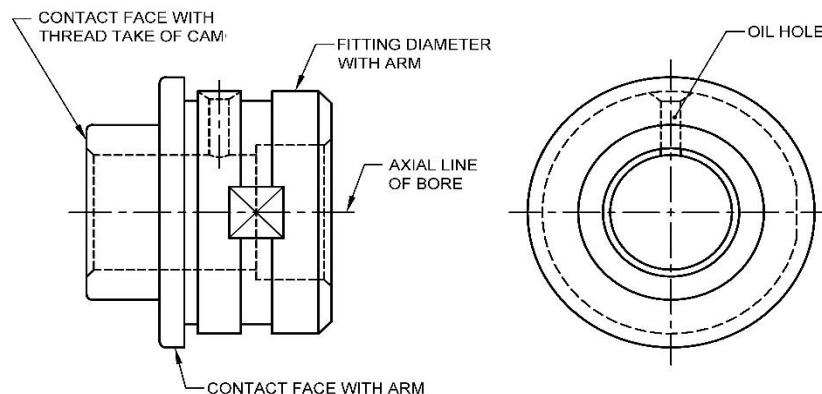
NOMENCLATURE FOR ARM SHAFT FRONT BUSH
